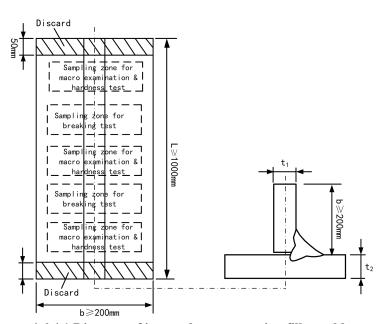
Diagram of incomplete penetration fillet weld test assembly and sampling positions
